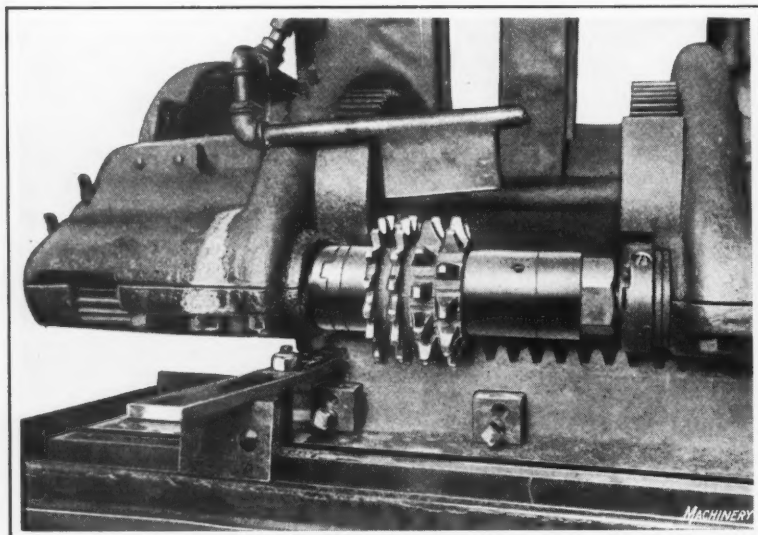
Machine equipped with a Gang of Two Roughing and Two Finishing Cutters
